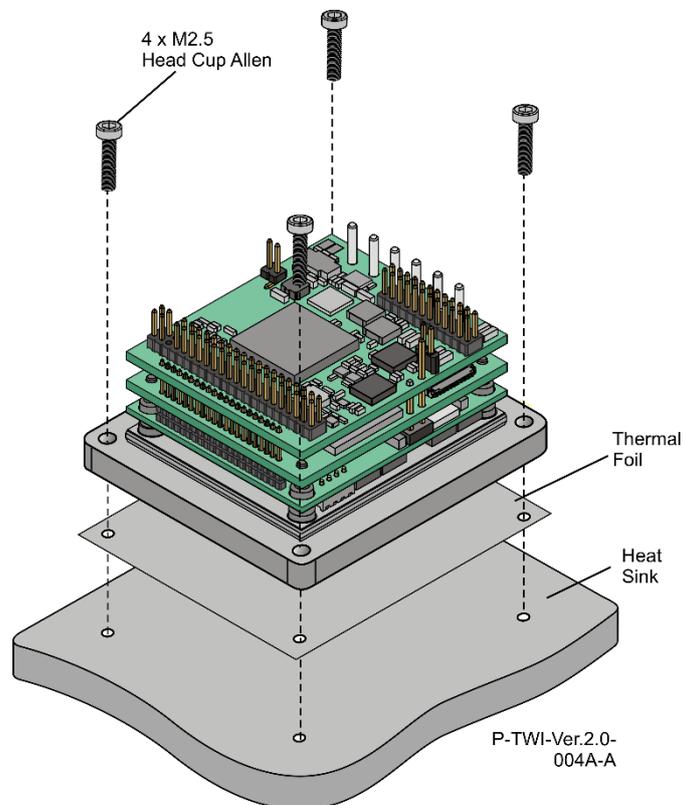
Mounting the Heat Sink and Thermal Foil to the Platinum Twitter
